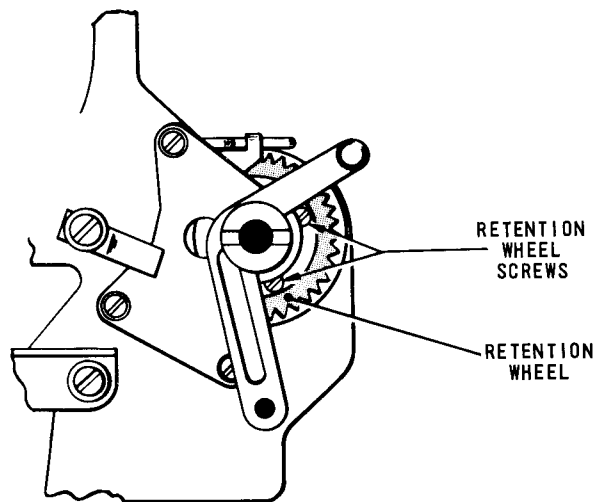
SPROCKET FEED PLATEN—LEFT-HAND END
